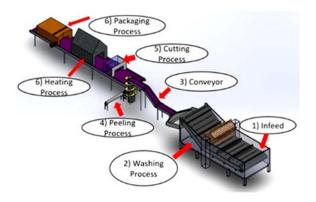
Design of Fruit Peeling Machine Combining Rollers and Belt
